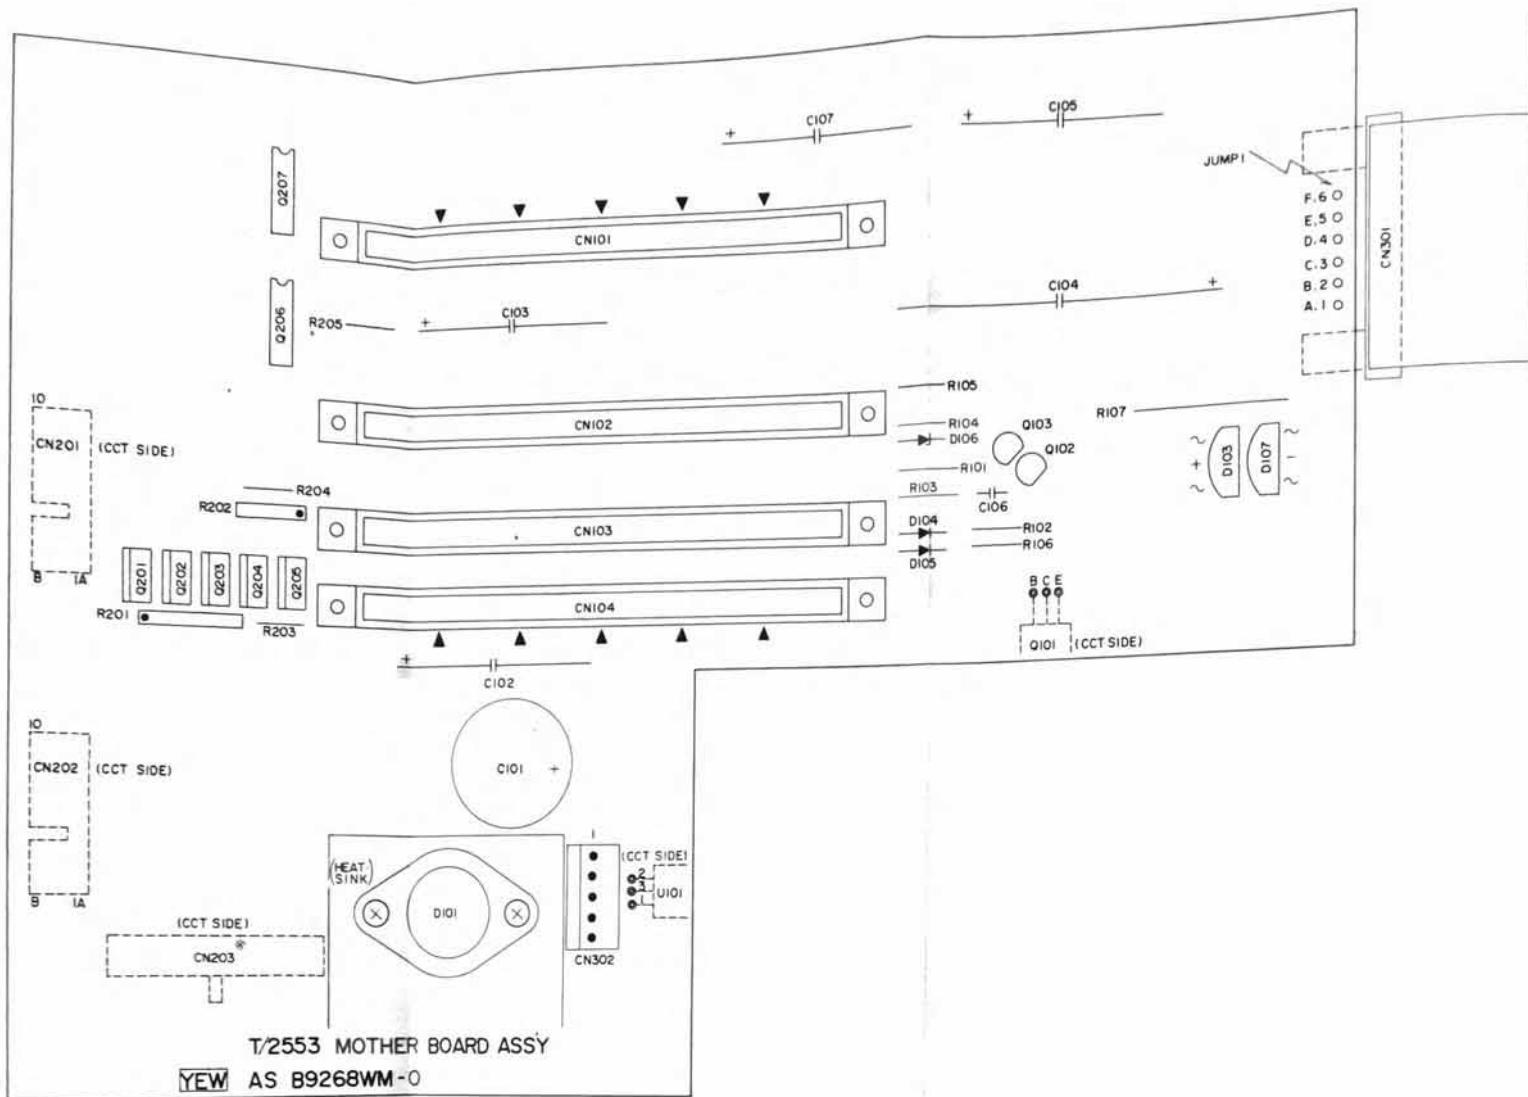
Mother Board PCB Ass'y: B9268WM
